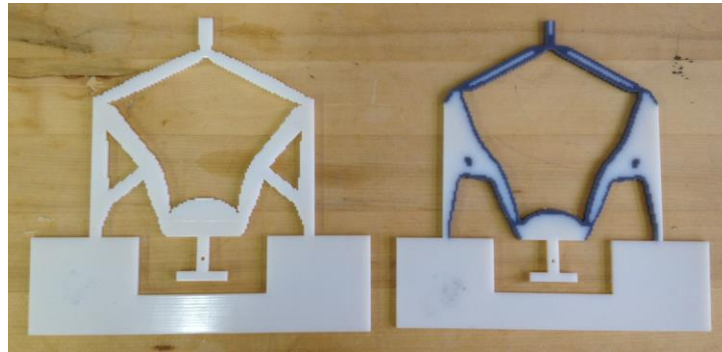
Compliant Specimens with Load and Cantilever Attachments
